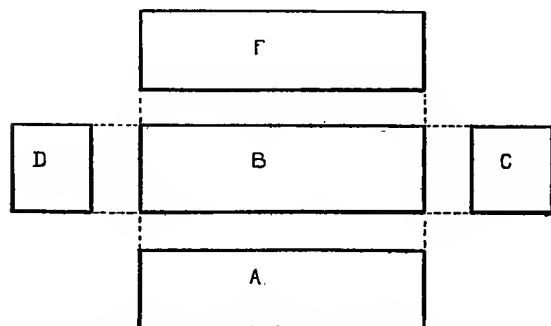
Mechanical Drawing Showing Different Views of Rectangular Block Shown in Fig. 54
